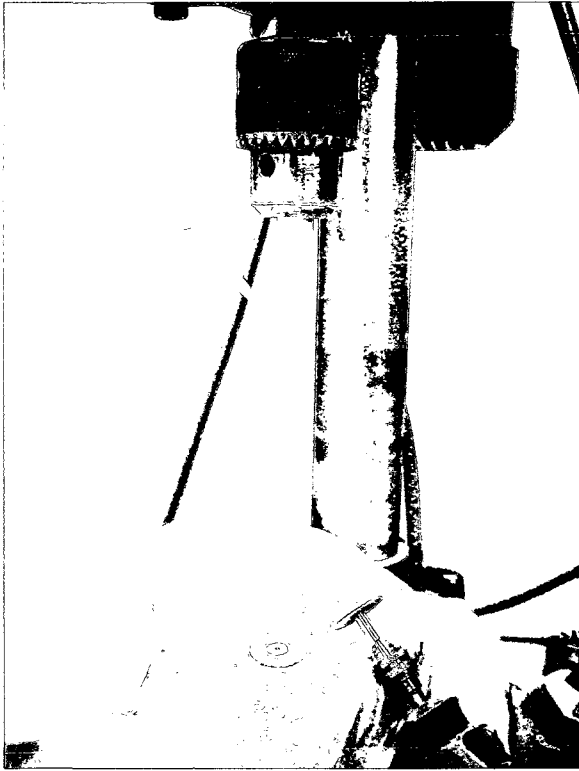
Photograph of the makeshift lathe used to machine an alumina tube into a sleeve used in sample mounting.
